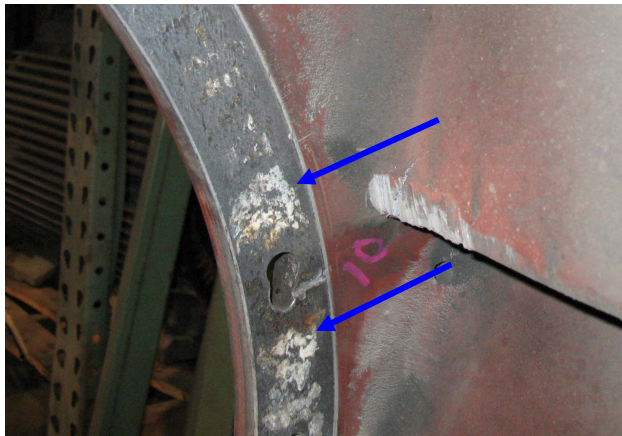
Fan mounting surface fretting corrosion damage
